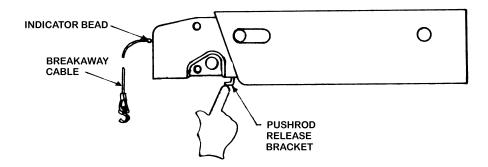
CHECKING AND RESETTING BREAKAWAY CABLE
